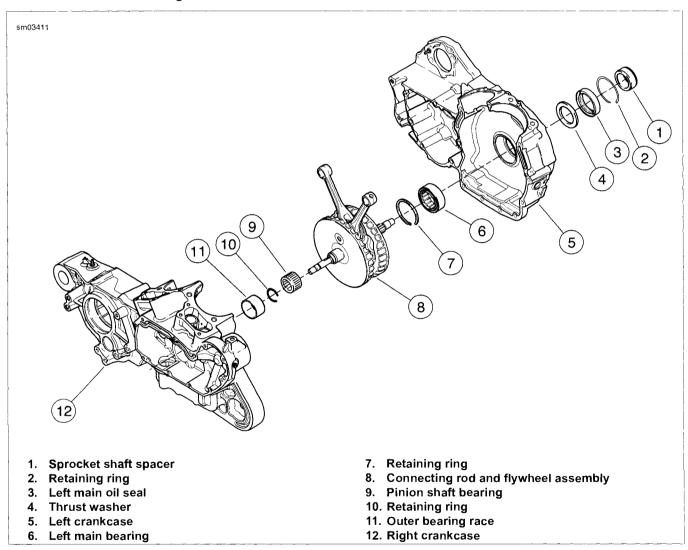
Crankcase and Flywheel Assembly (typical)
